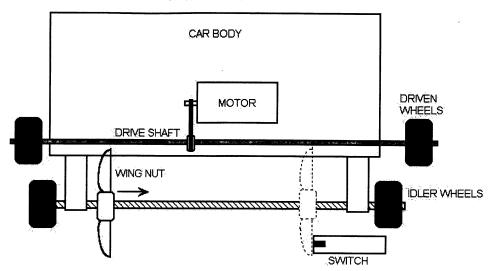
Idler wheels turn the threaded rod which is not driven by the motor
